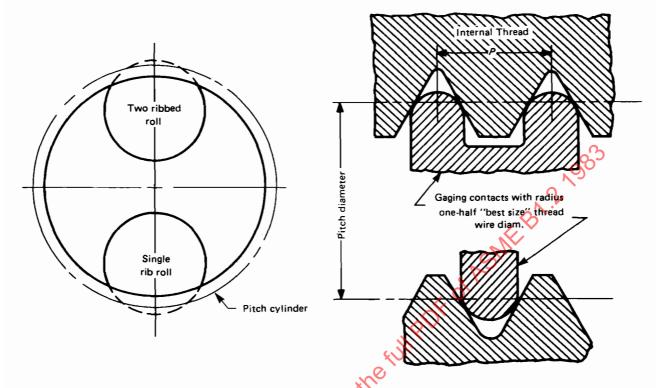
THREAD SNAP GAGES - MINIMUM-MATERIAL THREAD GROOVE DIAMETER LIMIT
